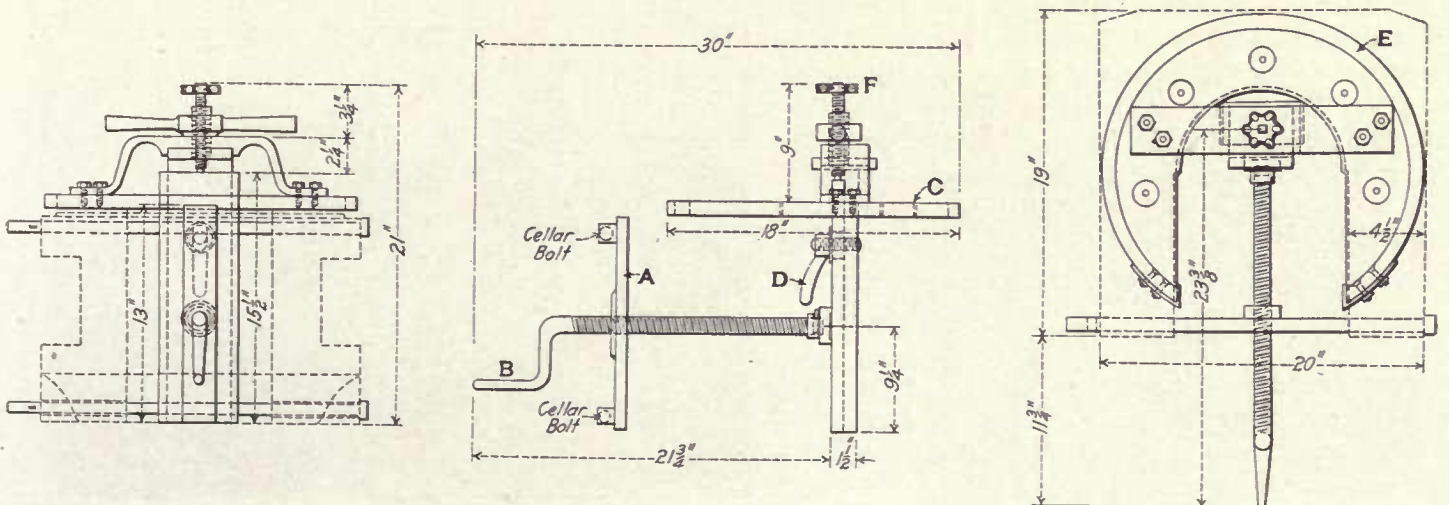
Jig for Babbitting the Faces of Driving Boxes.
